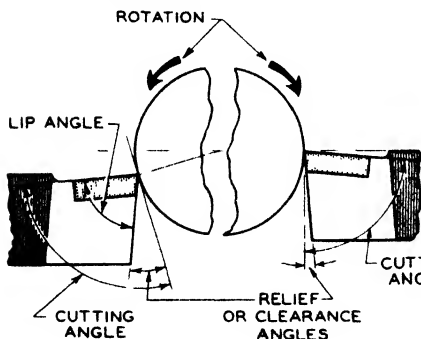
How the Cutting Angle May Vary with the Setting of the Tool
